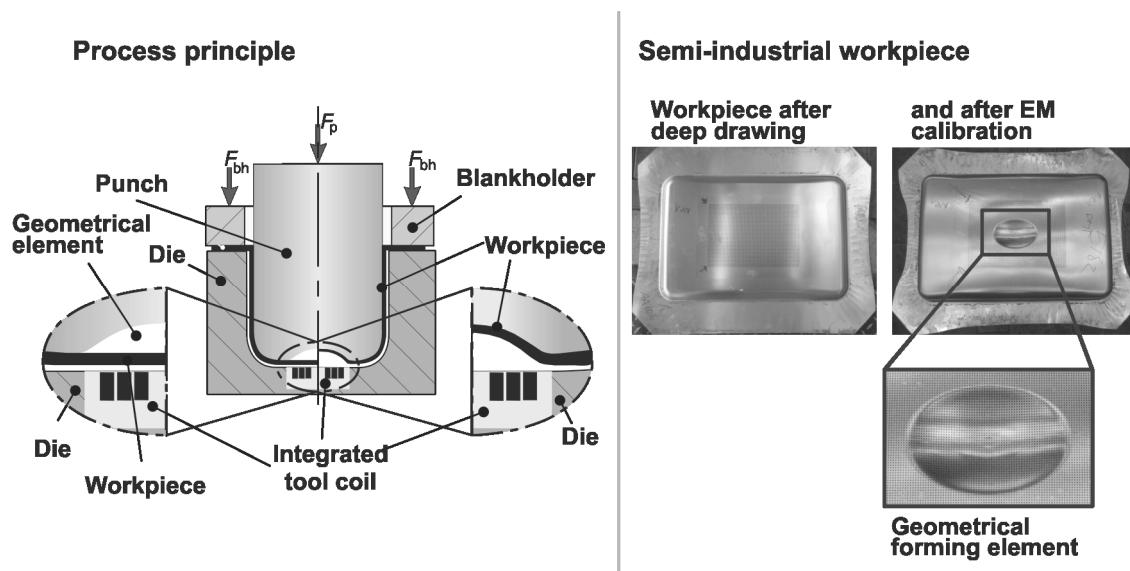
a) Principle of the integrated process b) semi-industrial workpiece
